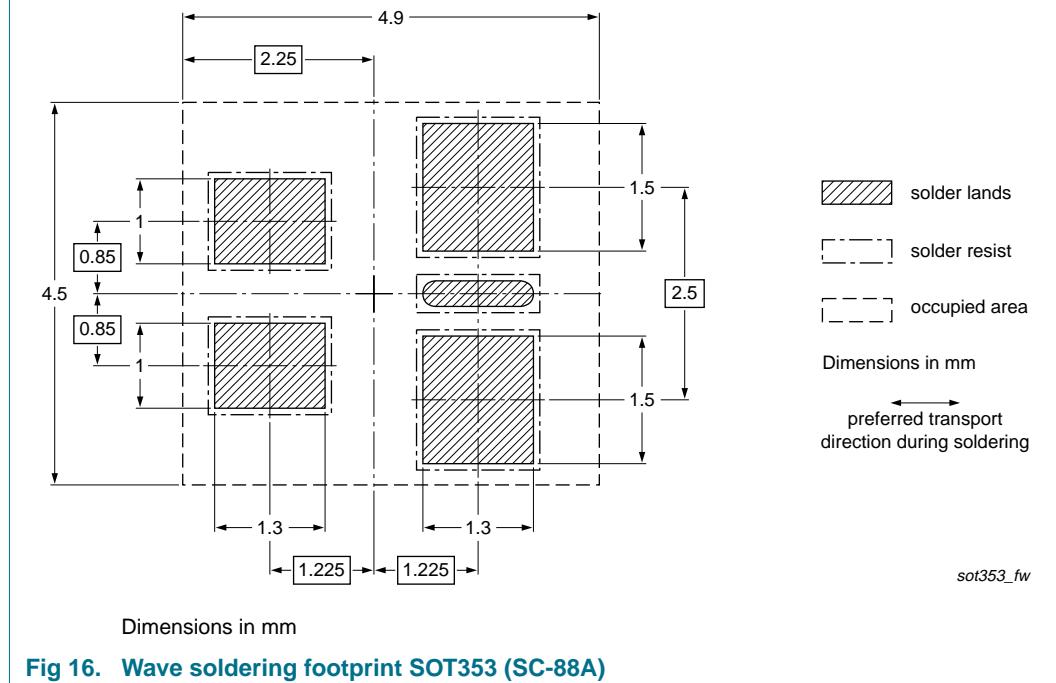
Wave soldering footprint SOT353 (SC-88A)
